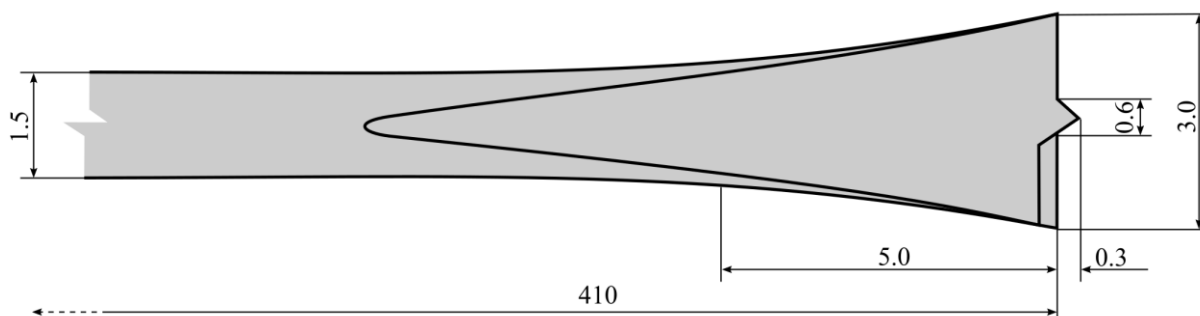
Shape and dimensions (in mm) of the tip of the resistograph steel drill
